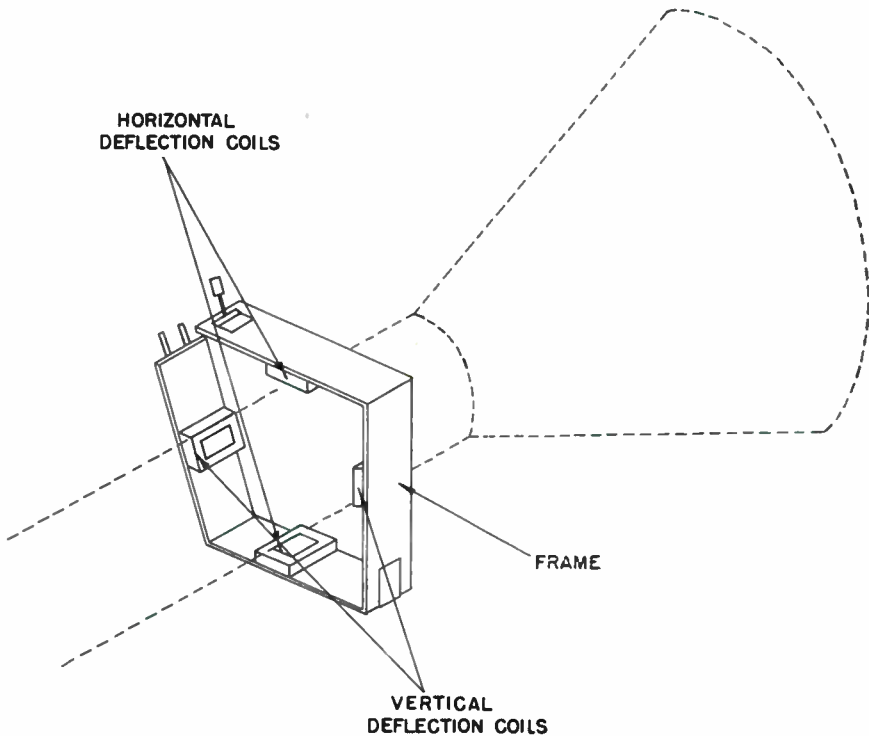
Typical yoke and solenoid assembly for electromagnetic deflection
